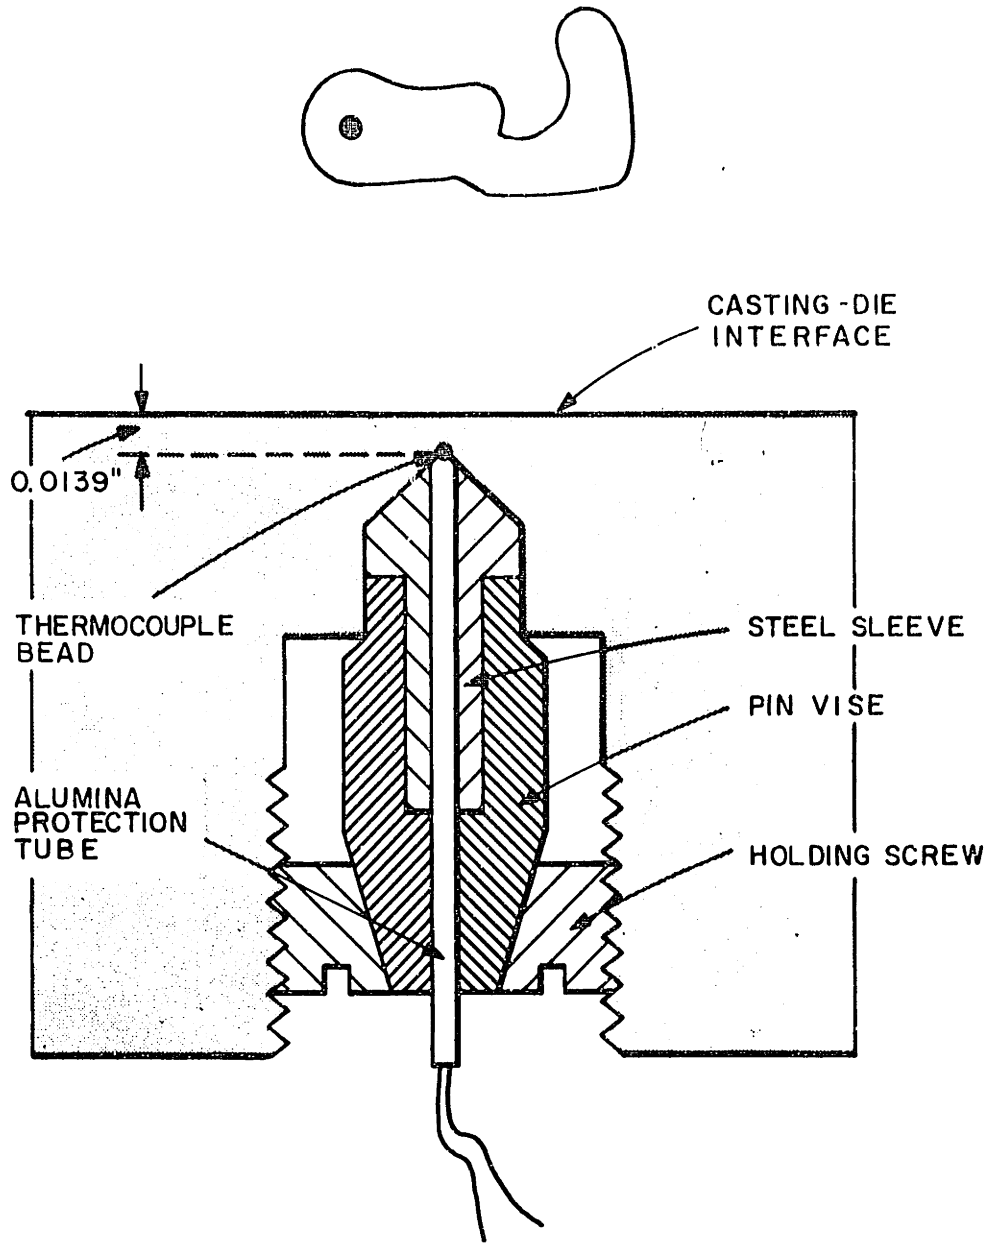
Schematic of thermocouple assembly in the high pressure die casting machine. Figure on top shows position of the thermocouple in the die cavity.
